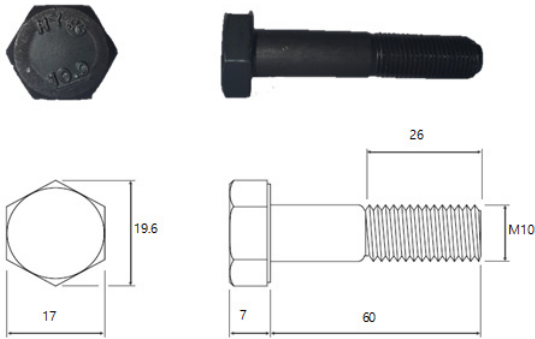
Shape and dimensions of M10 bolt (unit; mm).
